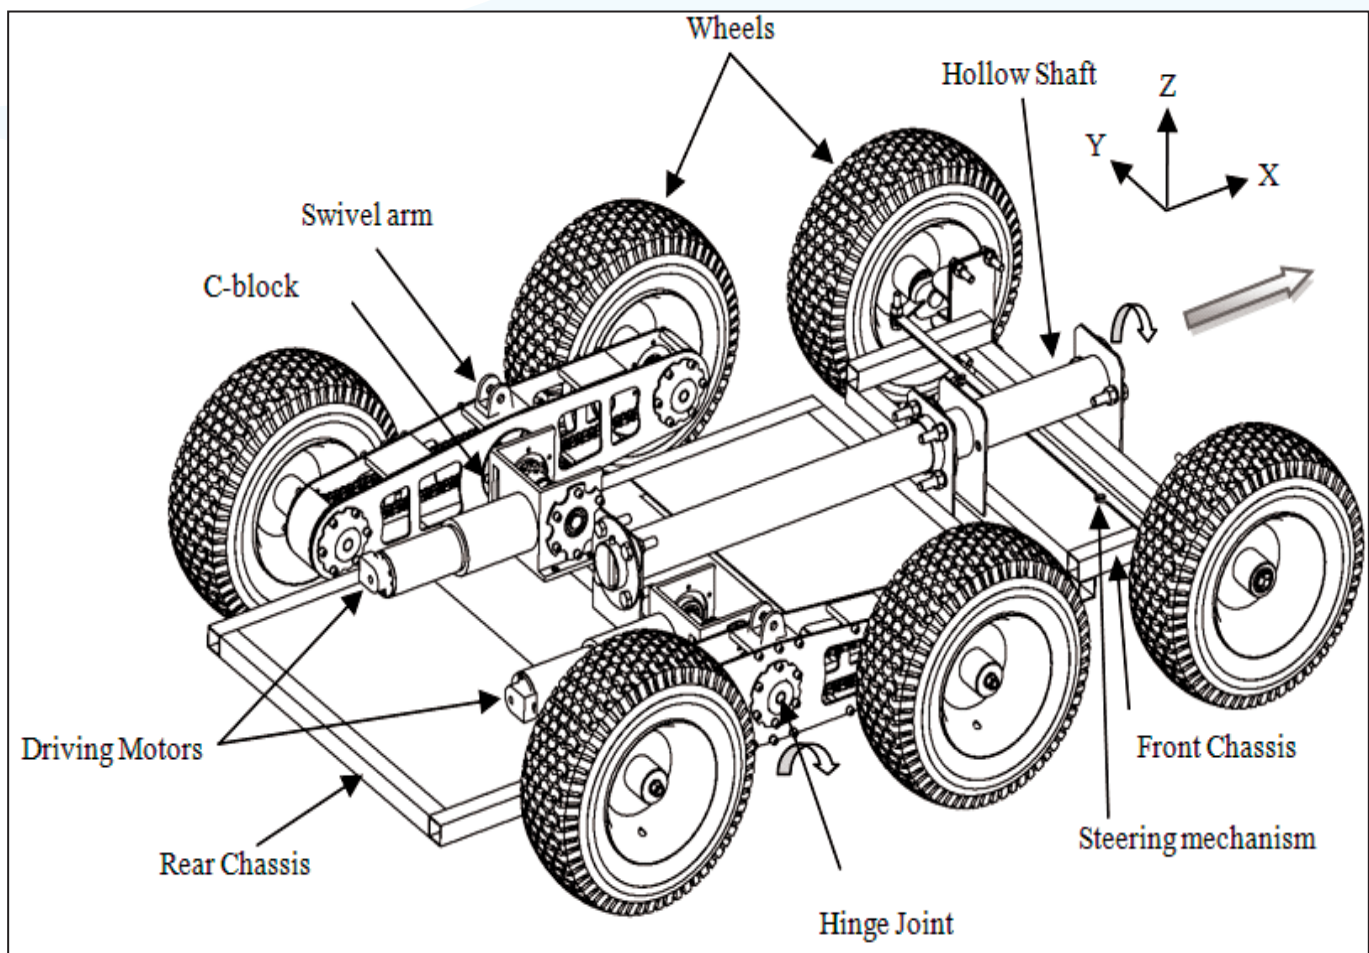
3D CAD view of General Assembly of the Robot along with different parts
